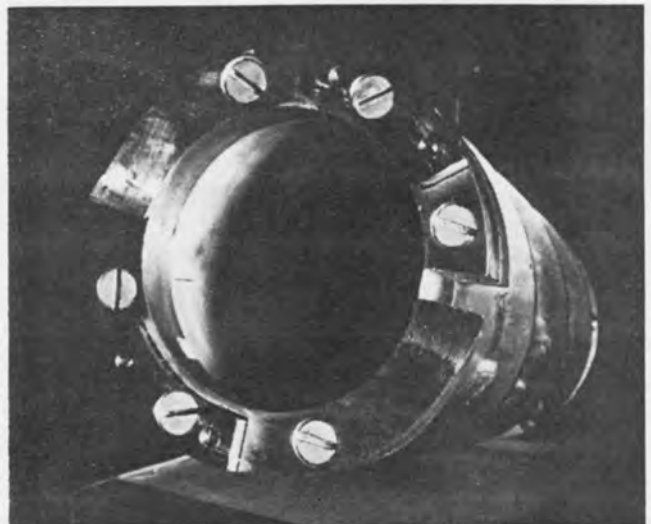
End view of coring auger cutting shoe. Note riding shoes used for adjusting depth of cut.
